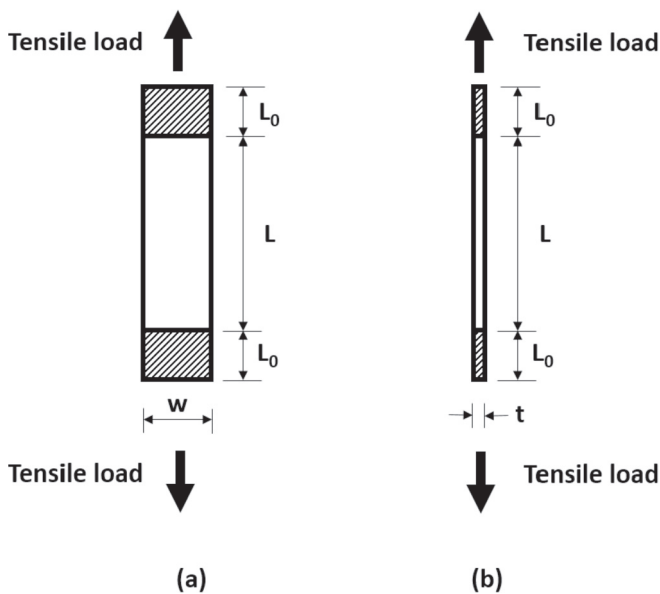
Sketches of a uniaxial tensile test specimen: (a) Front-view (b) Side-view.
